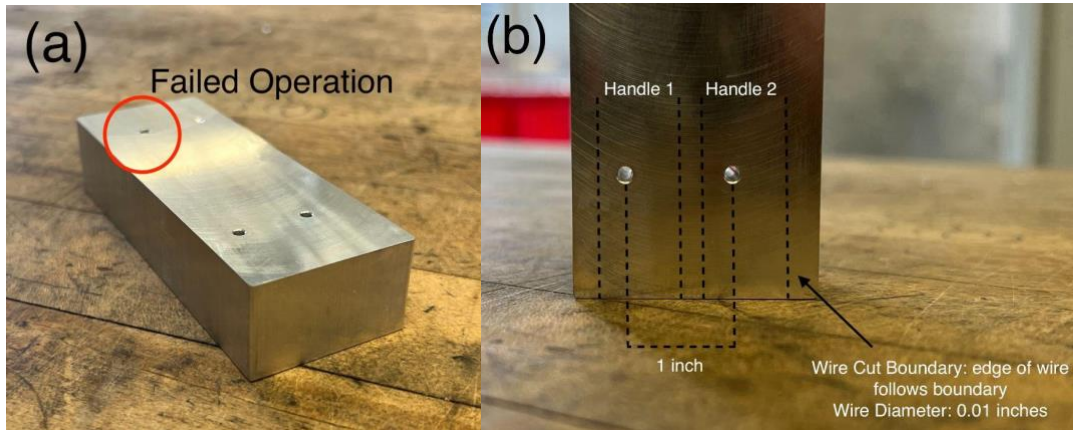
Stock Material for Key Handle Showing (a) Pilot Holes and (b) Instances of Key Handle
